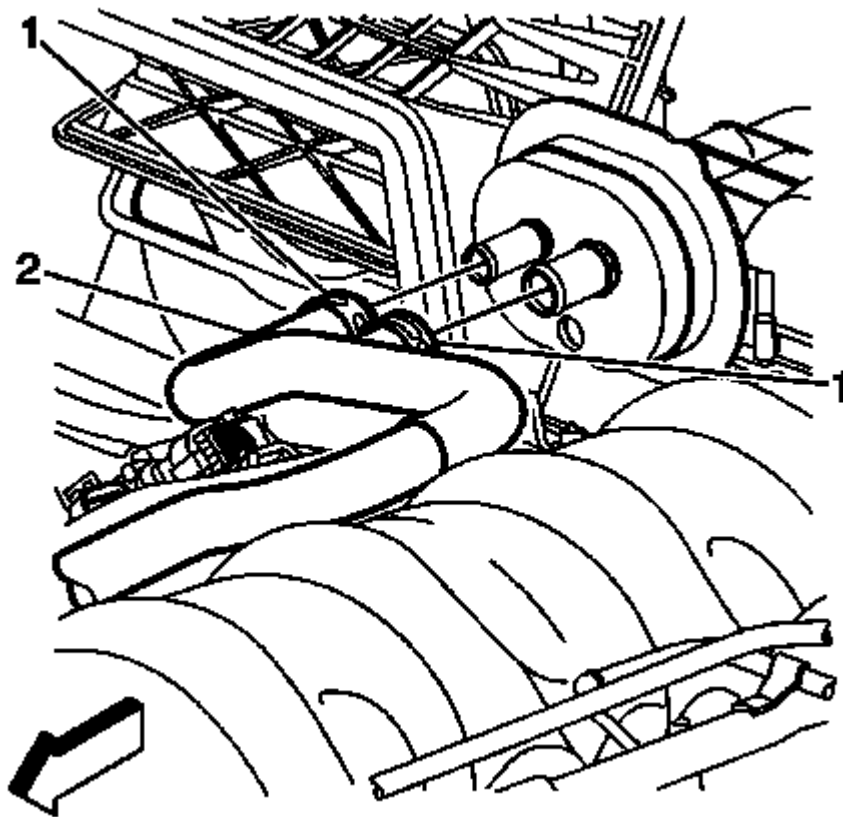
Heater Inlet & Outlet Hoses & Clamps At Heater Core
